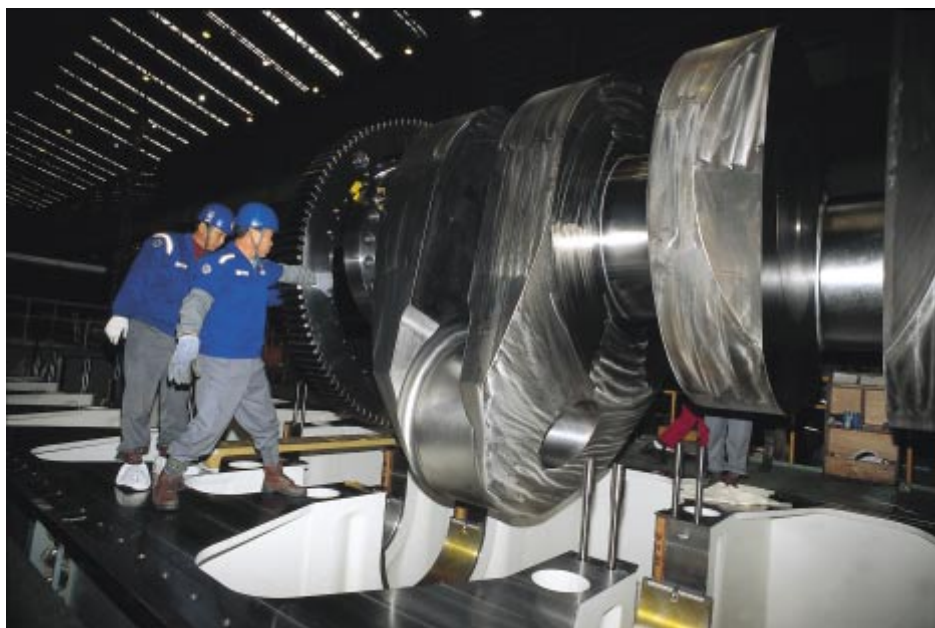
Fitting the crankshaft into the bedplate of an RTA96C engine.
